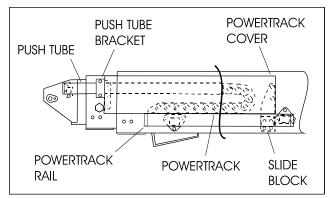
Reassembly of Components - Boom Powertrack Assembly
